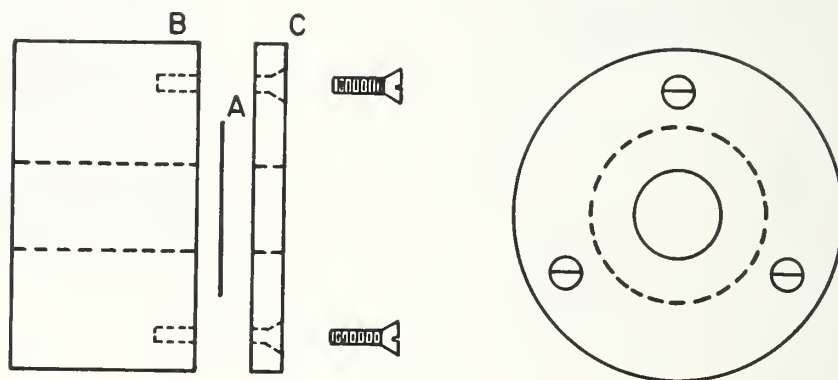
SKETCH OF DISK MOUNTING FIXTURE. THE SIDE VIEW AT THE LEFT SHOWS THE FIXTURE DISASSEMBLED WITH THE DISK (A) IN POSITION READY TO BE CLAMPED TO THE BODY (B) BY CLAMPING PLATE (C). AS EXPLAINED IN THE TEXT, THE DIAMETER OF THE BORE DETERMINES THE APERTURE, THAT IS THE AREA OF DISK EXPOSED TO THERMAL RADIANT ENERGY. THE OUTER DIAMETER OF THE FIXTURE IS SET BY THE REQUIREMENTS OF THE TRANSDUCER MOUNTING BLOCK.
